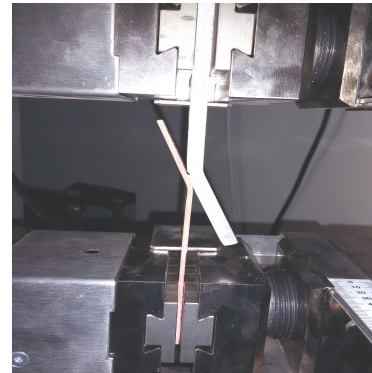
Tensile test of a FSW joint (withdrawal) [2]
